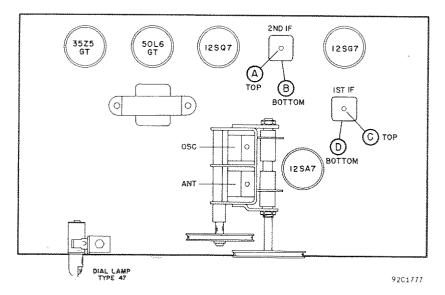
Top View of Chassis Showing Location of Alignment Adjustments, Tubes and Dial Lamp
